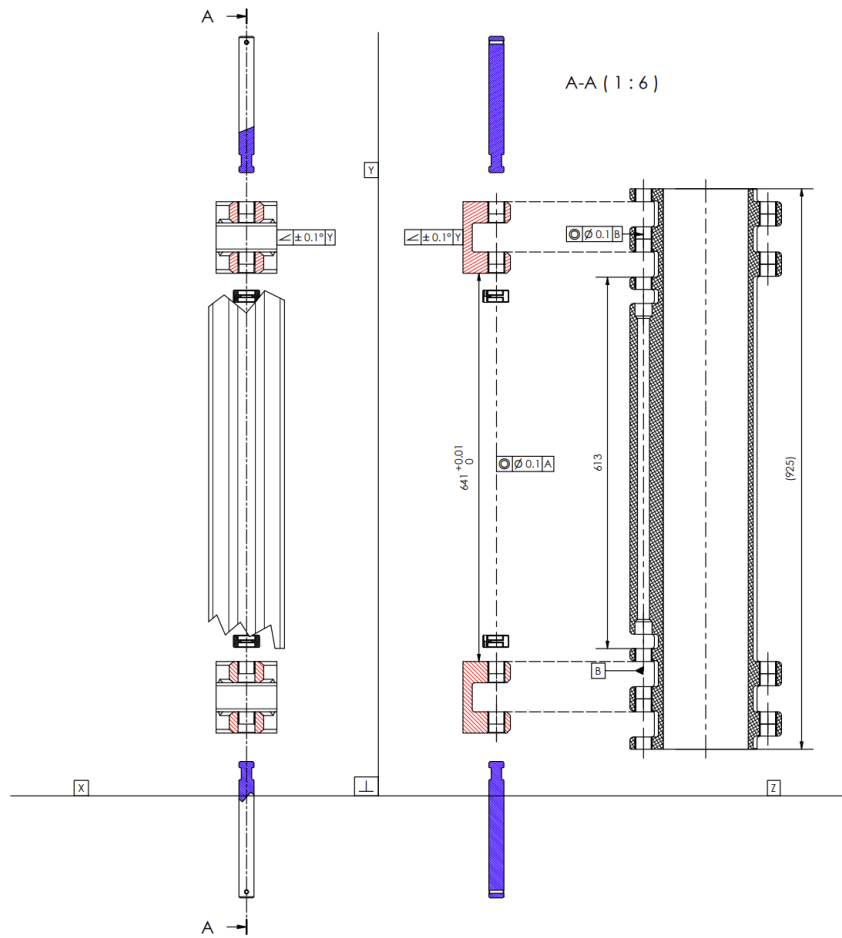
JibFlex XL mounting interface and tolerances.
